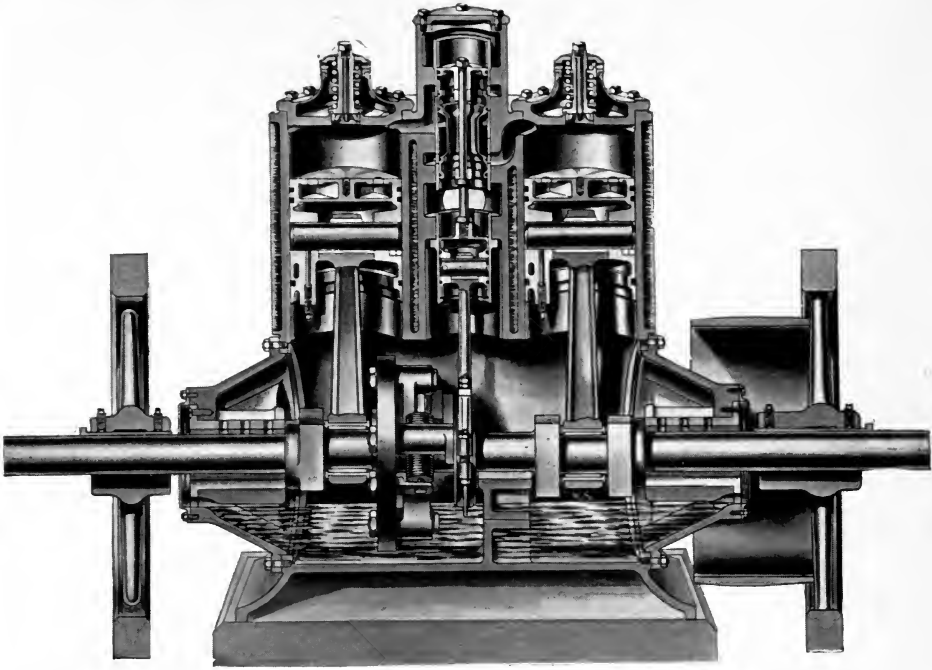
LONGITUDINAL SECTION THROUGH CRANK SHAFT—"SENTINEL" SIMPLEX HIGH-SPEED ENGINE.
